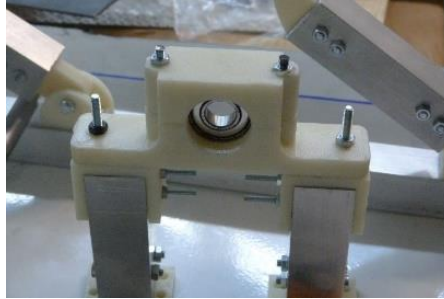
Lifting Mechanism Bearing Holder Assembly
